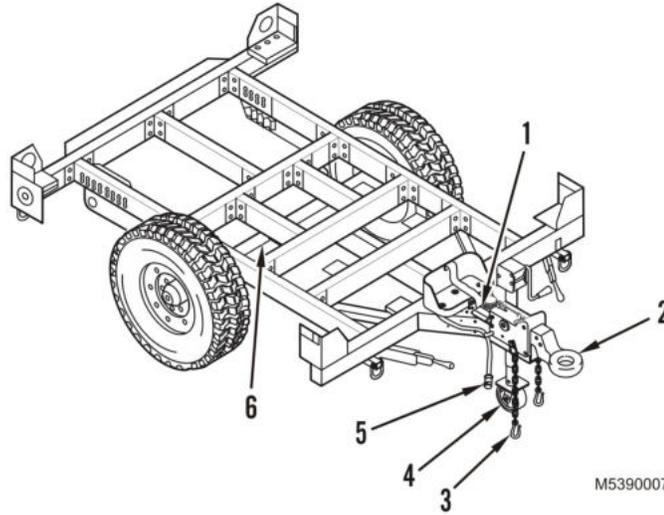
Trailer Chassis – Breakaway Cable Through Axle.
